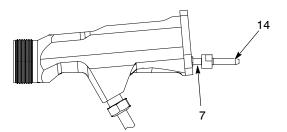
Packing Cartridge Replacement – Removing Trigger Puller
